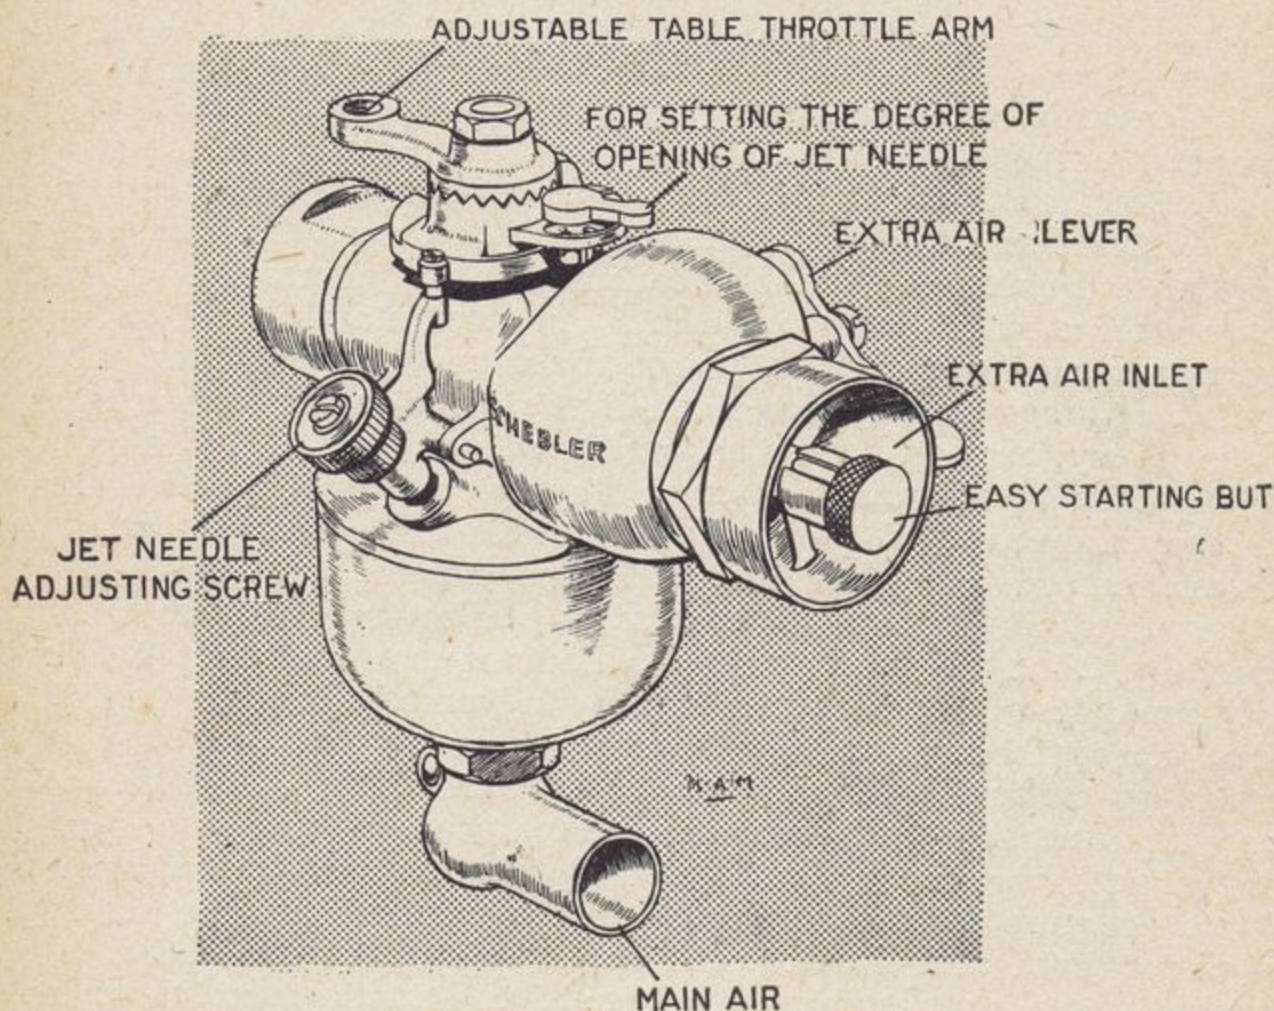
EXTERNAL VIEW OF THE AMERICAN SCHEBLER CARBURETTER.
